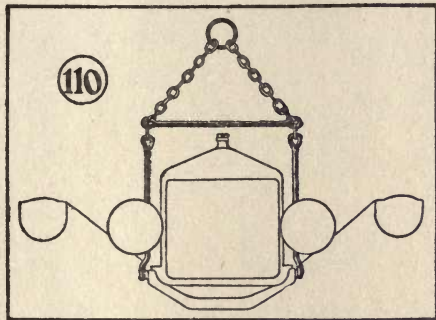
Front end hook in position. Each hook is placed on the fender iron below the nut on the end of the lamp bracket. The large ring at the top is put on the hook of a chain fall
